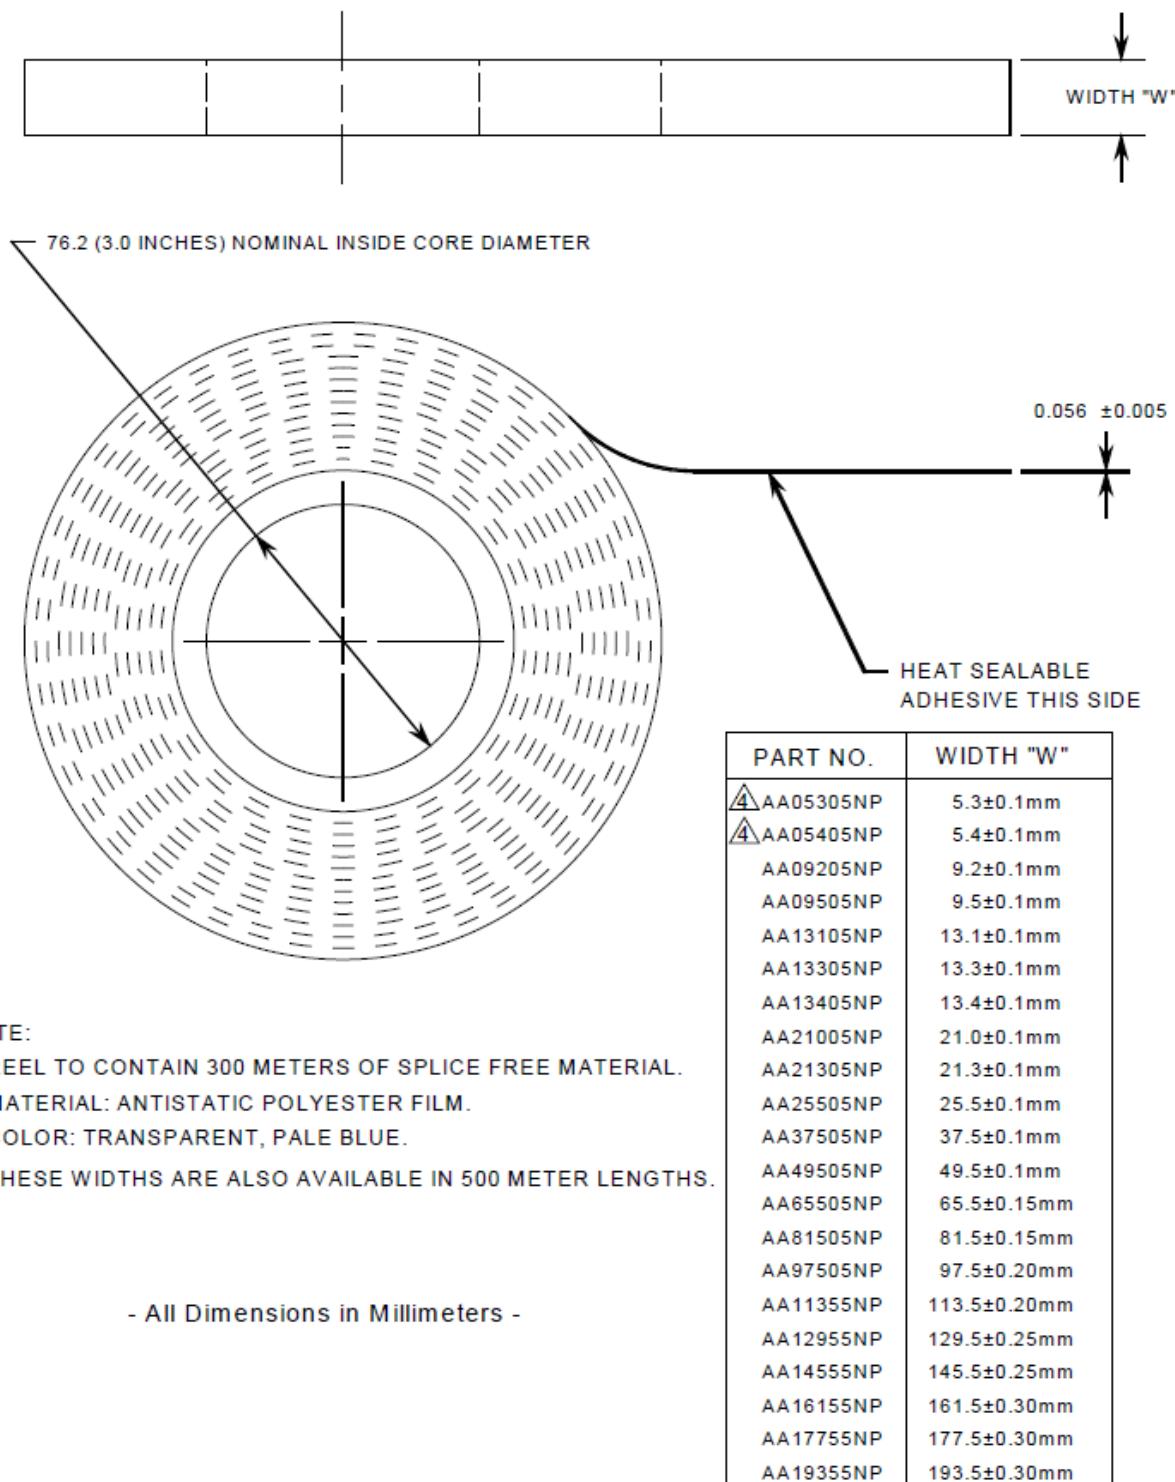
VNC2 –LQFP-64, QFN-32, QFN-48, QFN-64, FT311D-QFN Cover Tape Dimensions
